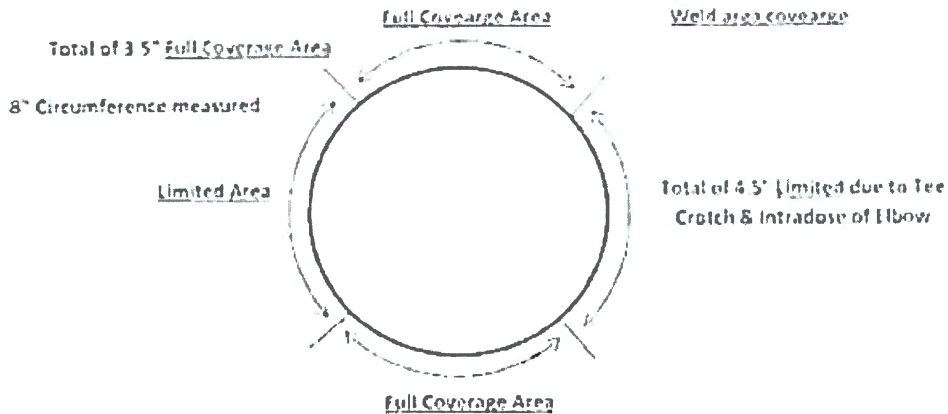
Figure M- Weld SLS-042B-FW015 Coverage (Pipe-To-Tee Weld)
